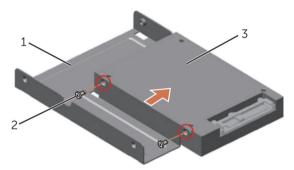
Removing and Installing a 2.5-inch SSD into a 3.5-inch HDD adapter
